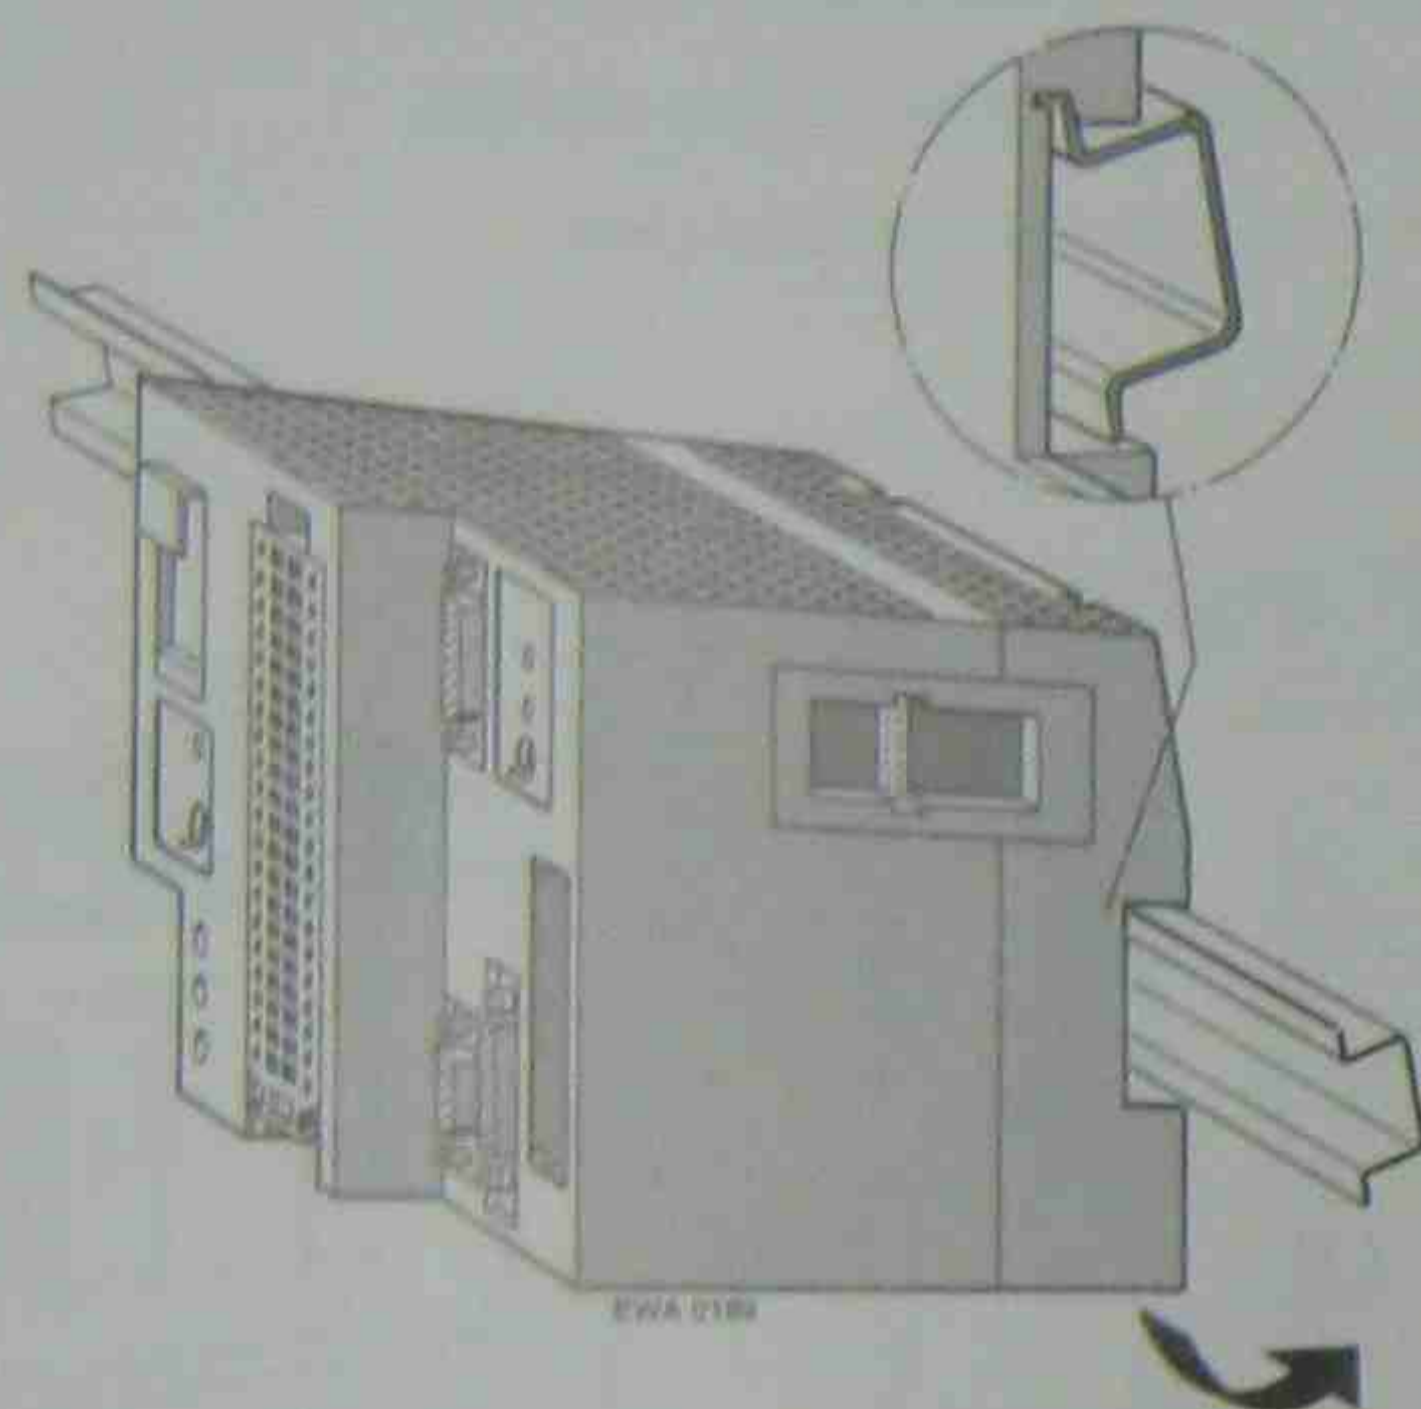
Mounting the Programmable Controller on a Standard Mounting Rail
